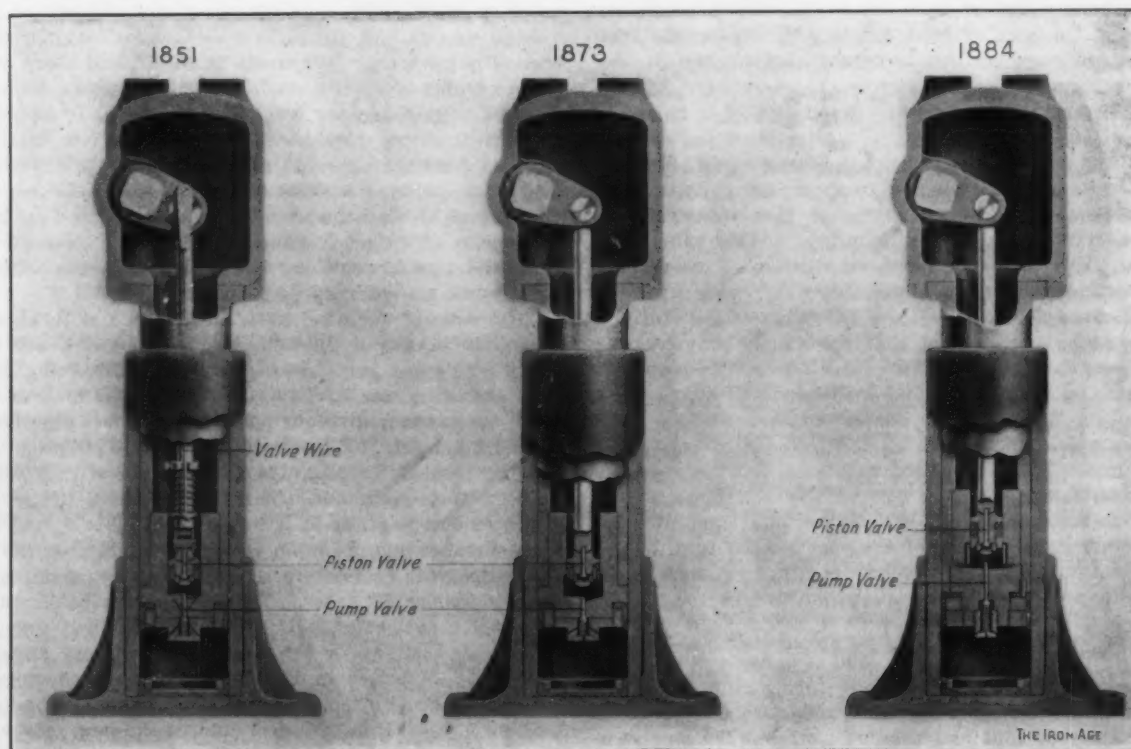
Sectional Views of the Dudgeon Hydraulic Jacks Patented in 1851, 1873 and 1884.
